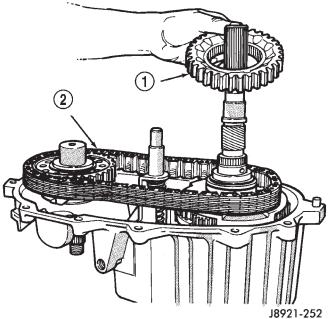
Drive Sprocket And Chain Removal 1 – DRIVE SPROCKET
